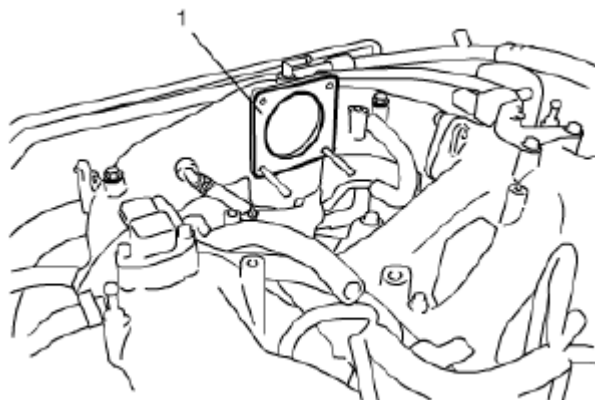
Identifying Water Hose & Electric Throttle Body Assembly
